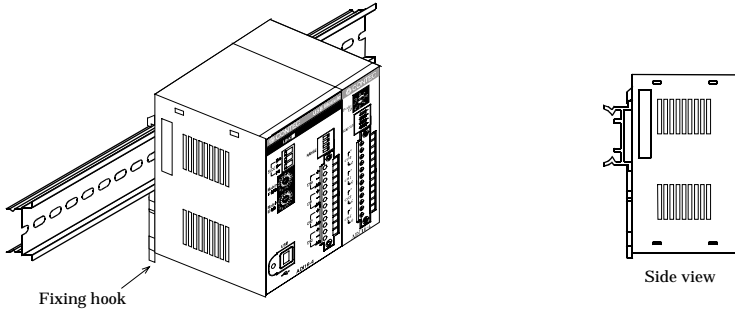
Mounting on a DIN Rail < 3 / 3 >
